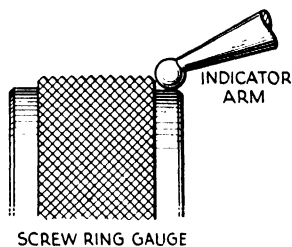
USING AN INDICATOR WHEN SETTING UP THE BLANK
